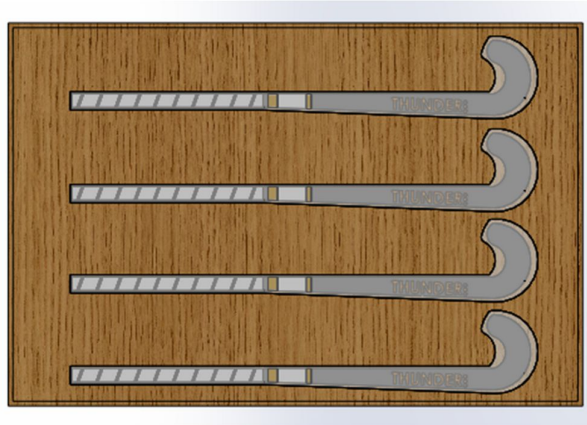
ECOTHUNDER packaging 3D CAD assembly (Source: Own)
